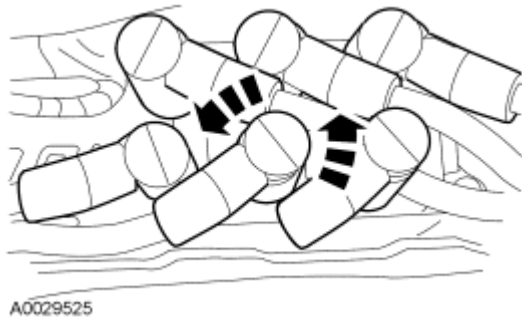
Disconnecting Spark Plug Wires From Ignition Coil
